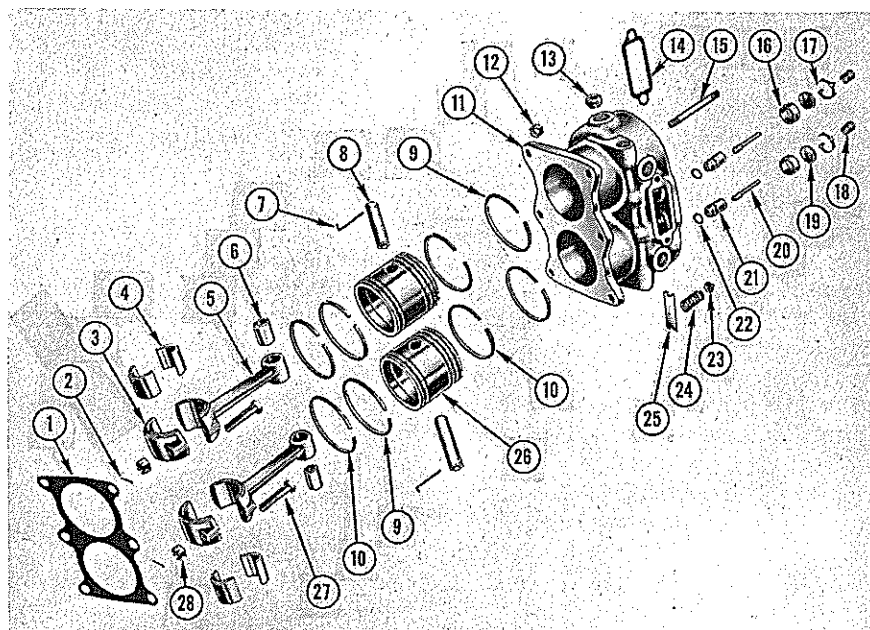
CYLINDER BLOCK, EXPLODED
